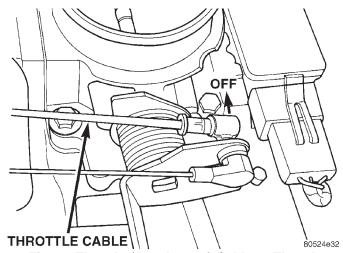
Throttle (Accelerator) Cable at Throttle Body—Typical
